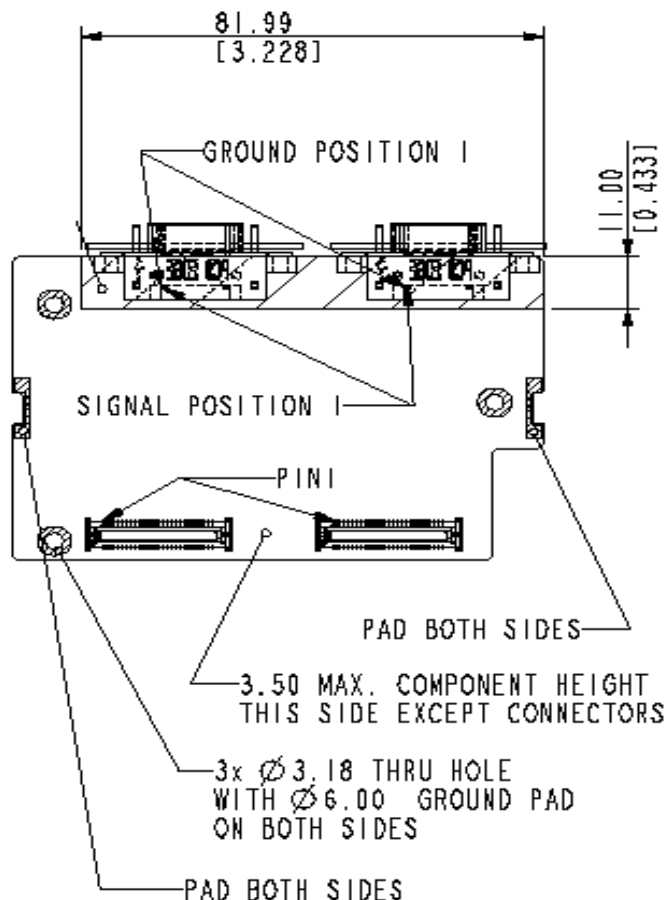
Dual 10 Gb Ethernet I/O Module Dimensions: Bottom View
